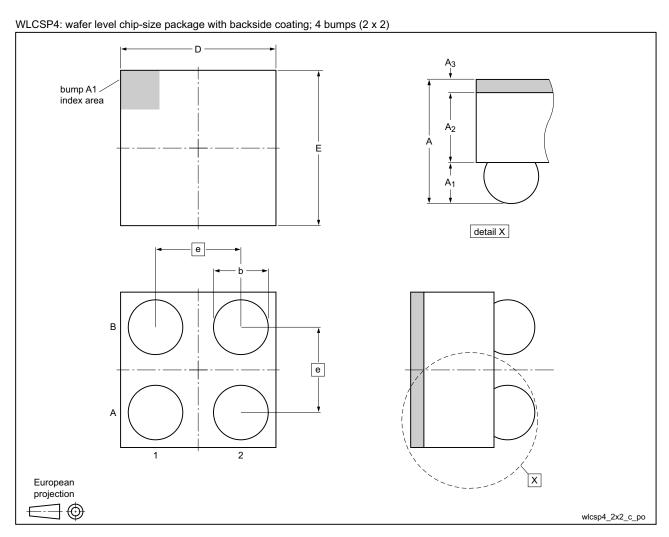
Package outline LD6836CX4/C (WLCSP4 with backside coating)
